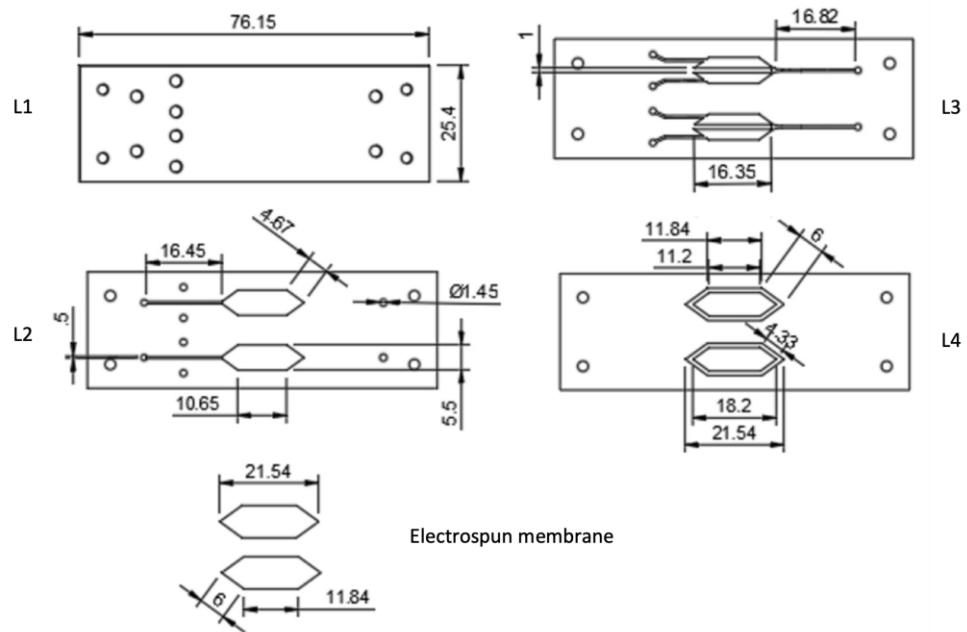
Technical drawings of the Brain-on-Chip (BoC) device separated into its functional layers. Dimensions of inlets, outlets, channels, and electrospun membrane housing are expressed in millimeters (mm). The scheme highlights the precise alignment of microchannels and the membrane interface, ensuring proper fluidic separation and controlled communication between compartments.
